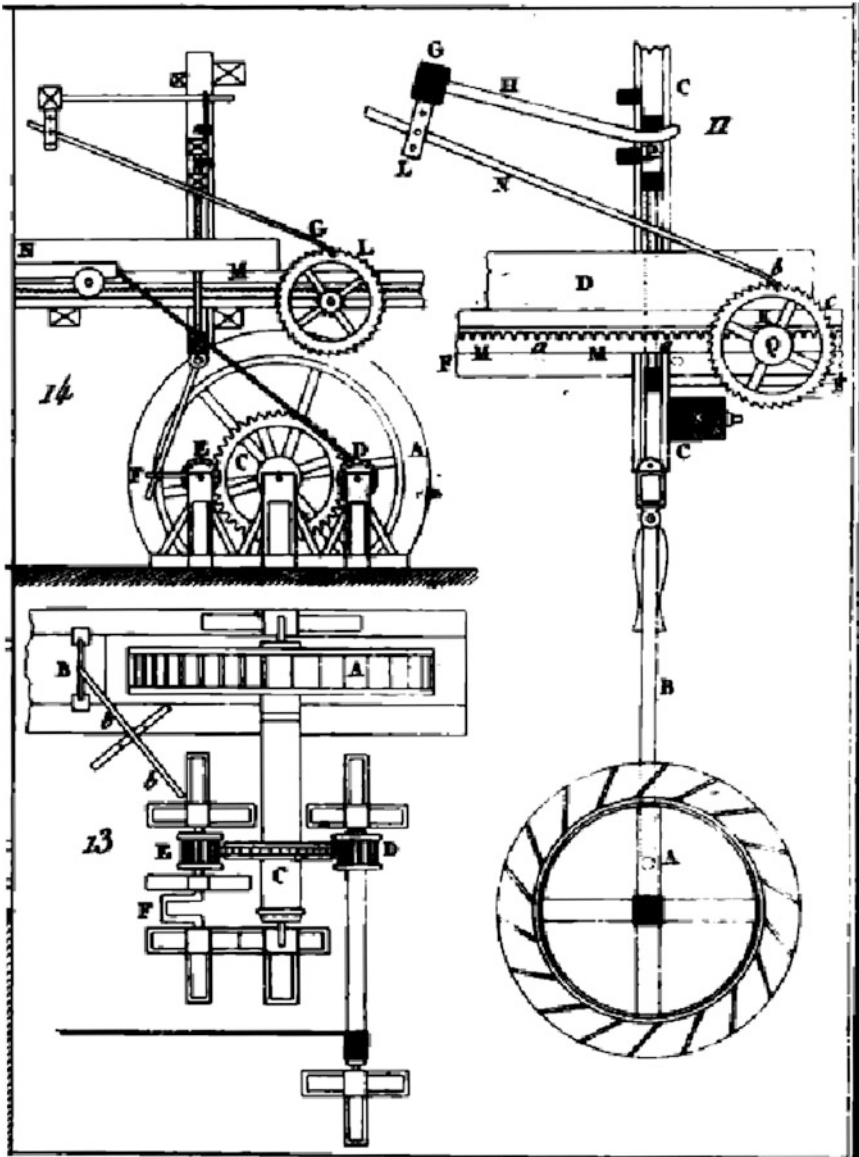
Example of Borgnis's study of automatic machines in Pl 4 from (Borgnis 1818c): an hydraulic-powered sawing machine
